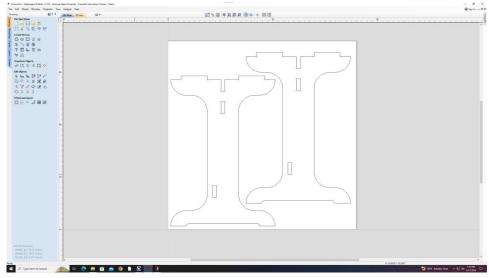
Placement of cutouts on the sheet(make sure cuts do not go outside of the sheet)
